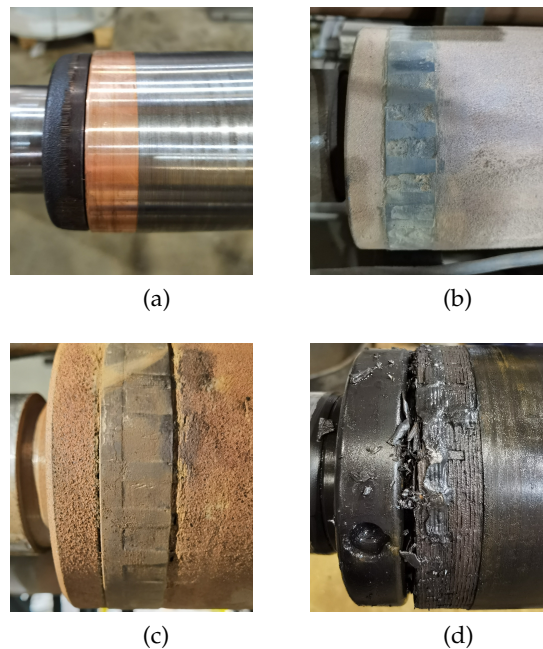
Rotor end-rings of deep well submersible motor pumps, in a motor repair shop: new (a) and different wear conditions (b), (c) and (d).
